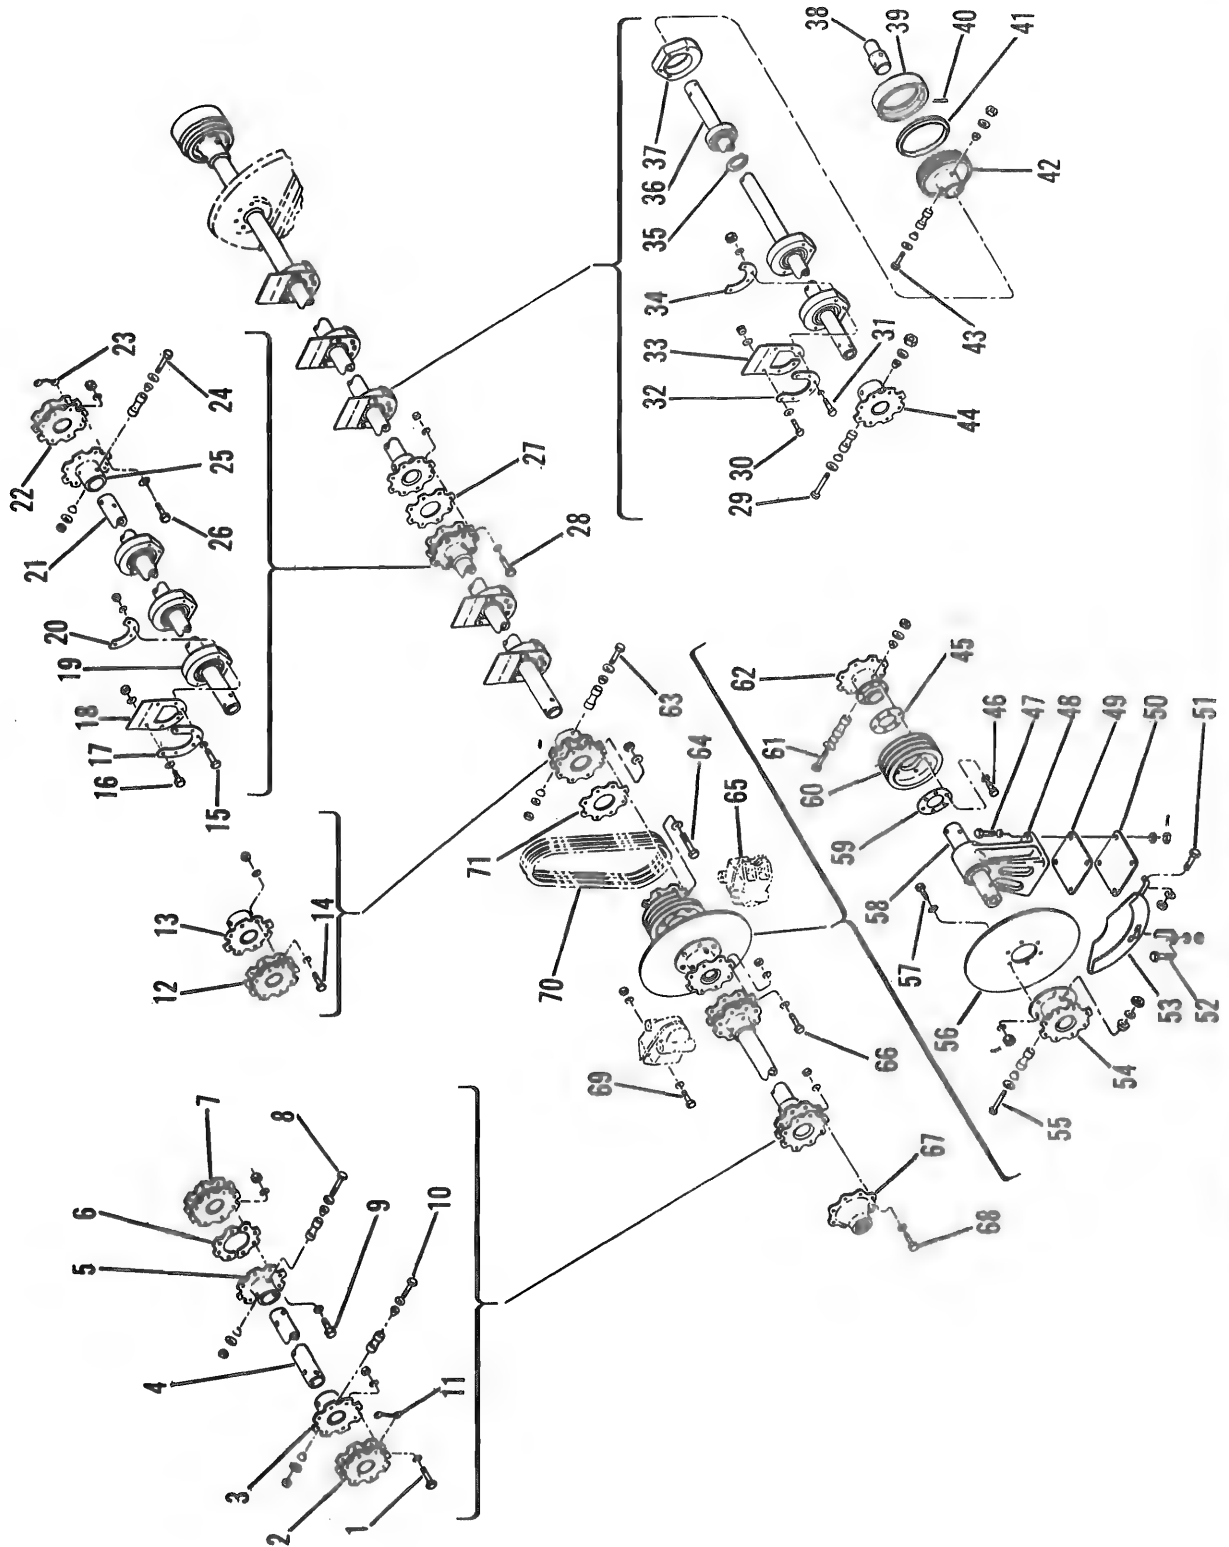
Tail Rotor Drive Shaft Removal and Disassembly (Sheet 1 of 2)
